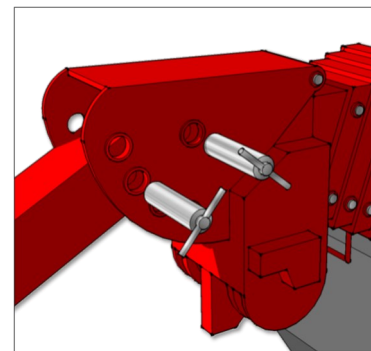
The Searcher Hook and its hardware is removed to make handling the Jib easier.
